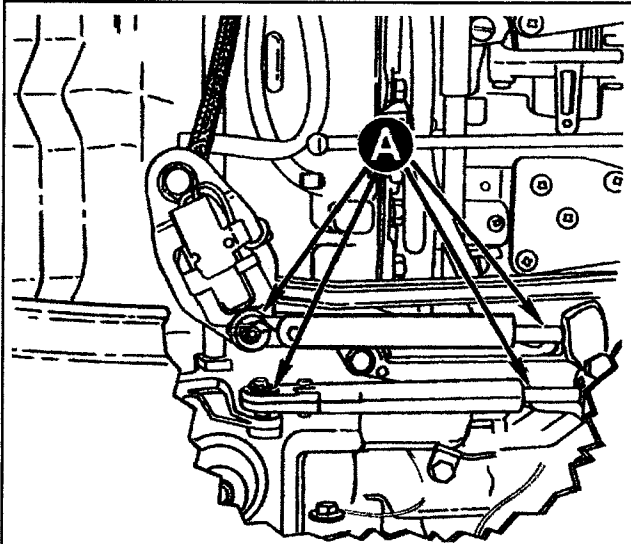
Throttle and shift linkage lubrication points-75-115 Hp (1726cc) V4 and 105 Jet-175 Hp (2589cc) V6 motors (carbureted shown, FICHT very similar)
